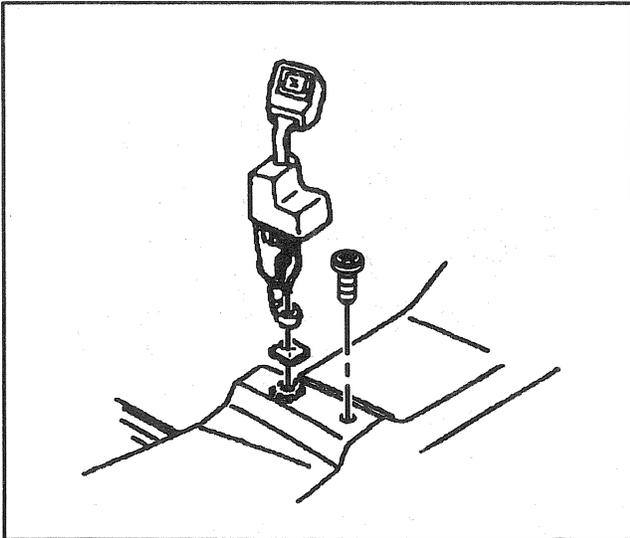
Front Seat Belt Attachments (Regular Cab with Bucket Seats)
